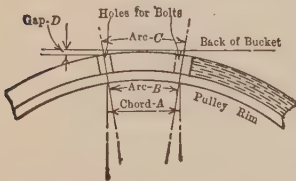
Double Row of Bucket Bolts Passing Over Pulley. (See Table 48.)
